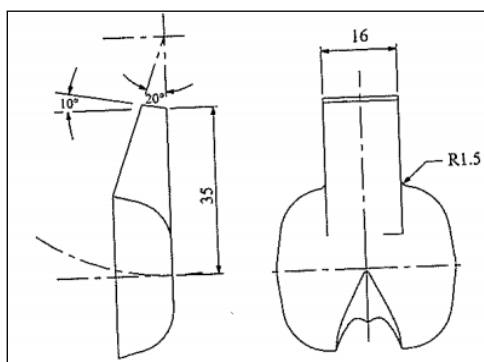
A basic bucket stem design for clamped or bolted fixing. All dimensions are in %PCD [Jeremy 2000].
